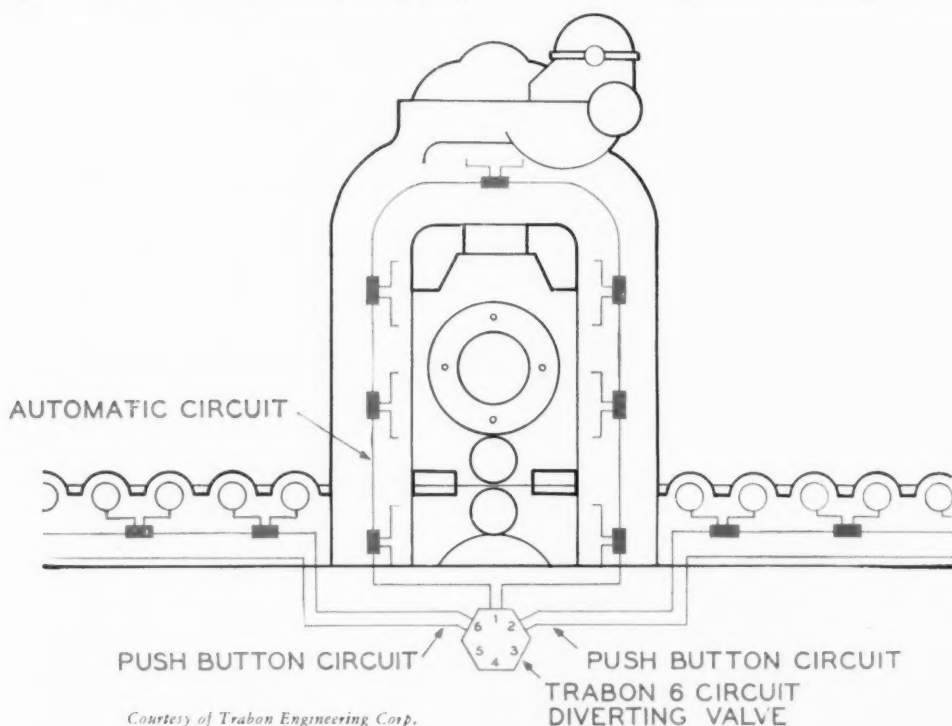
End view of a United mill, showing details of the lubricating systems serving the grease-lubricated roller bearings on the work rolls, and the oil lubricated Morgoil back-up roll bearings.
